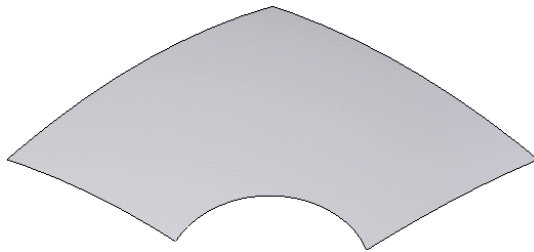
Resultant untrimmed surface with the Internal edges radio button selected
